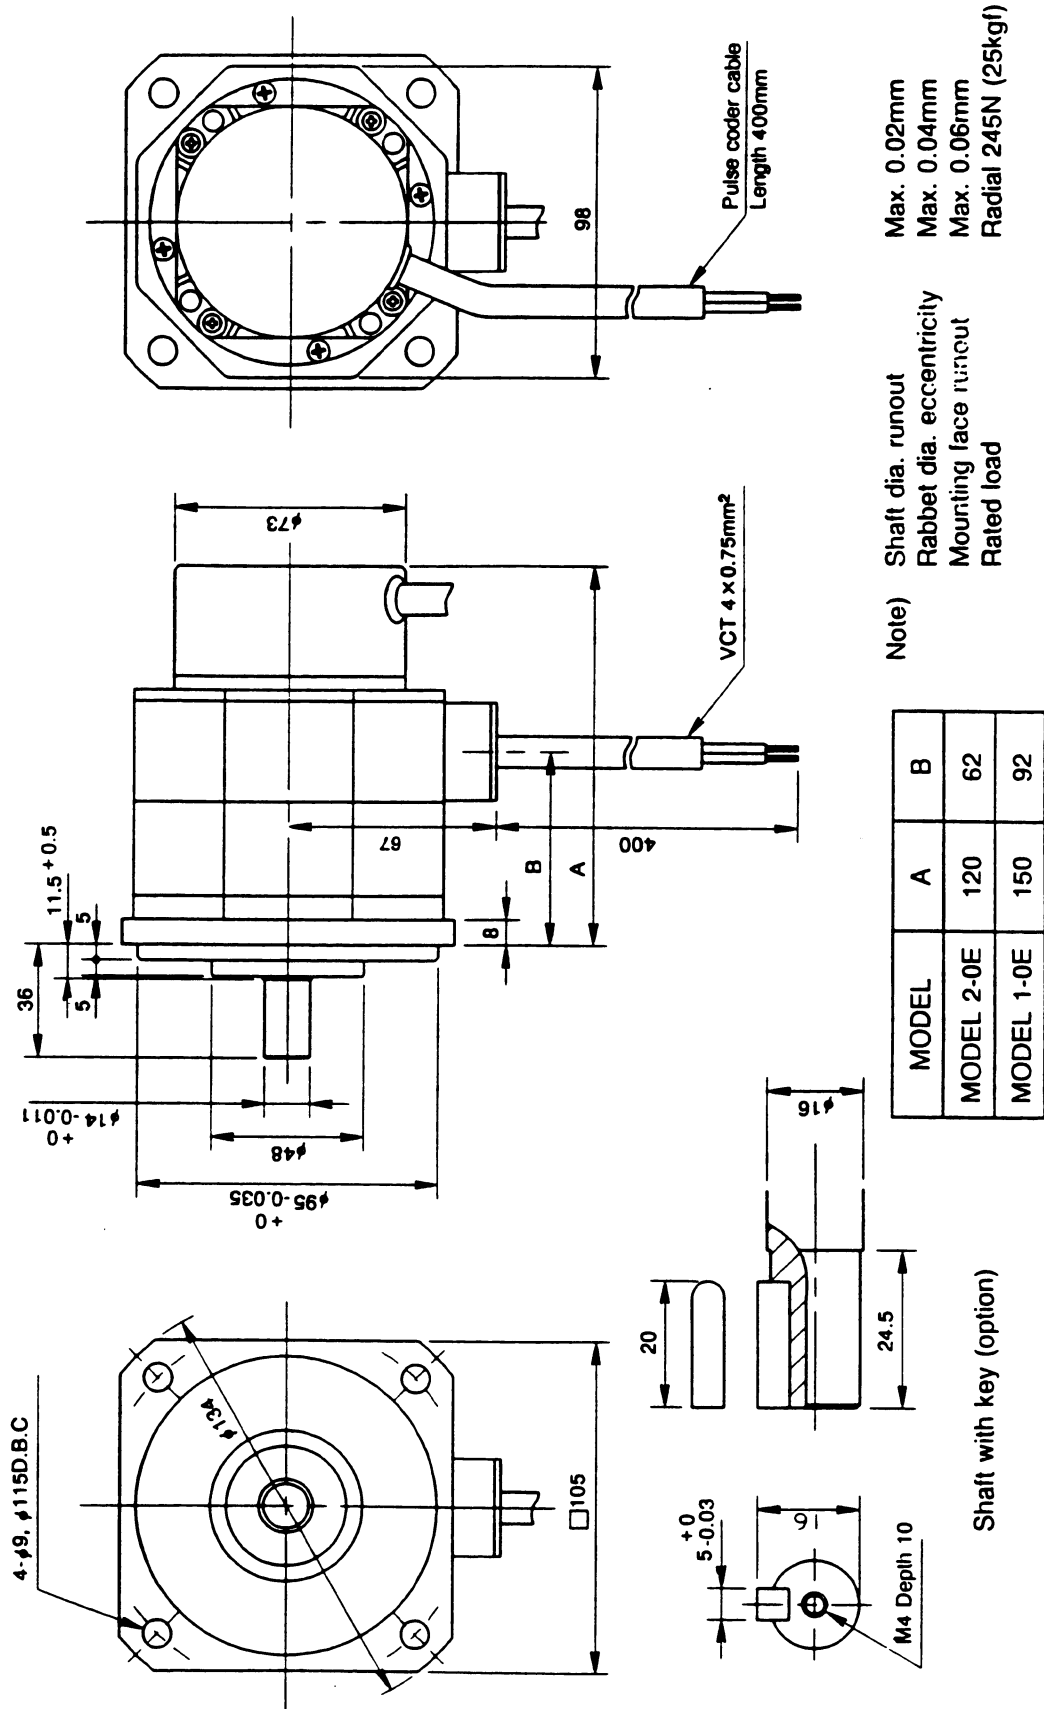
(a) AC Servo Motor 2-0E, 1-0E External View
